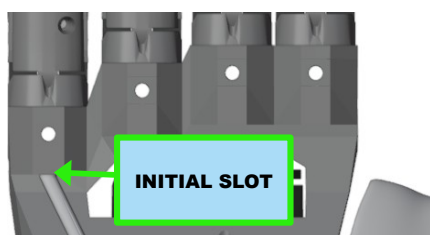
Inserting the tube into the initial slot (rear view)
